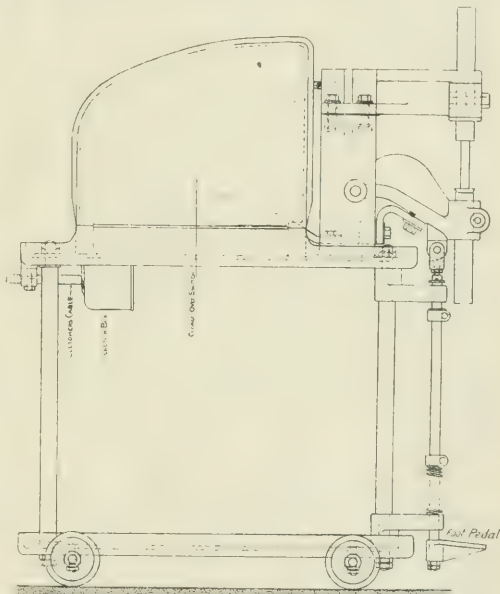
GENERAL ARRANGEMENT OF THREE-HEAD RIVET HEATER.
